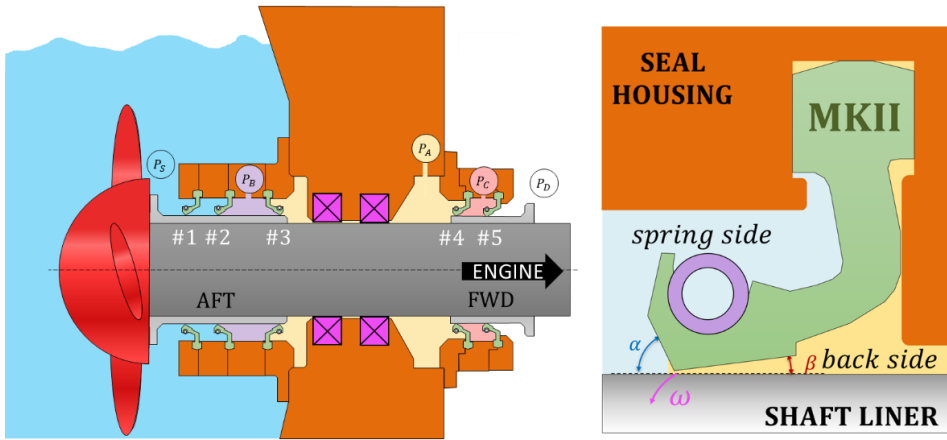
Sketch of a stern tube of a ship (left) and seal detail (right).
